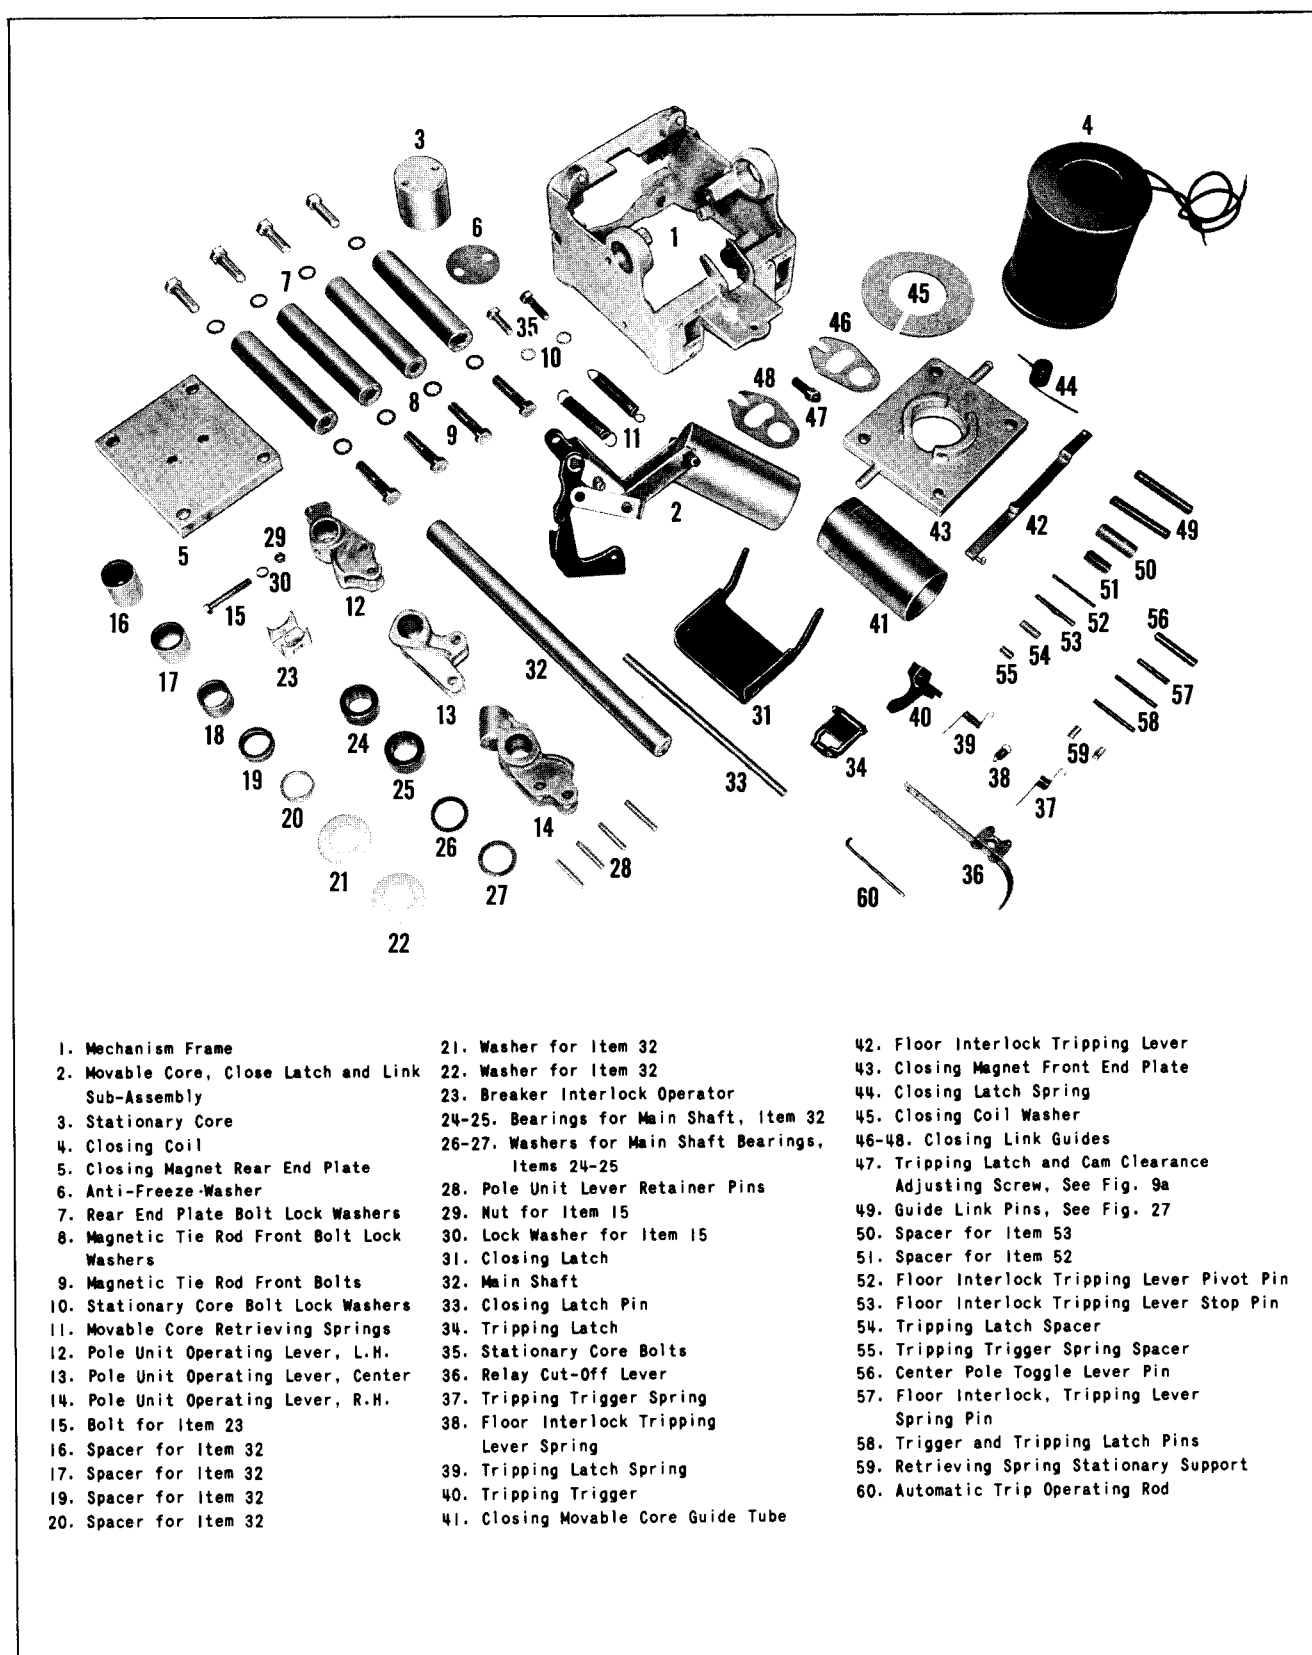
Parts for Solenoid Mechanism, 4.16 KV
